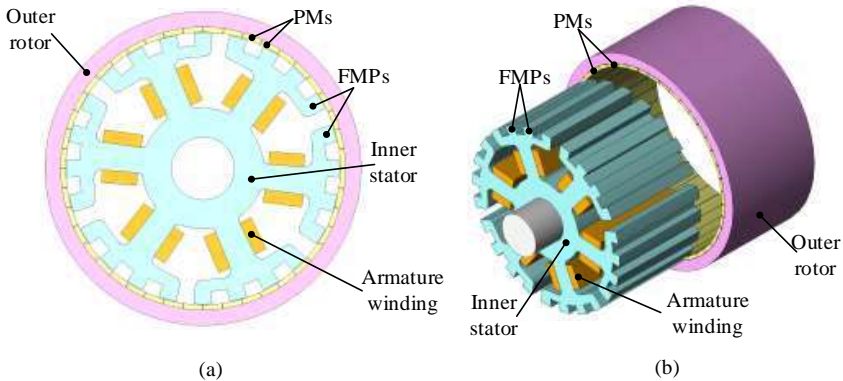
Configuration of outer-rotor VPM machine. (a) 2-D view. (b) 3-D exploded view.
